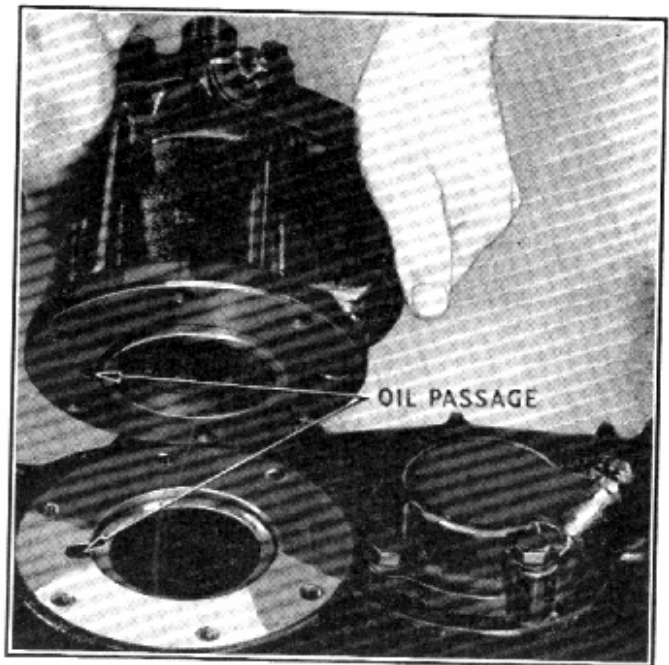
When Installing Declutching Carrier and Gasket Be Sure That Oil Passage is Not Obstructed
